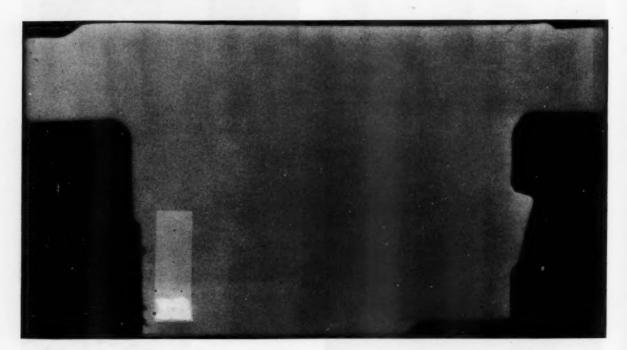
Radiograph of 1/4 inch thick slab, a mid-section of an aluminum bronze high pressure manifold casting.
